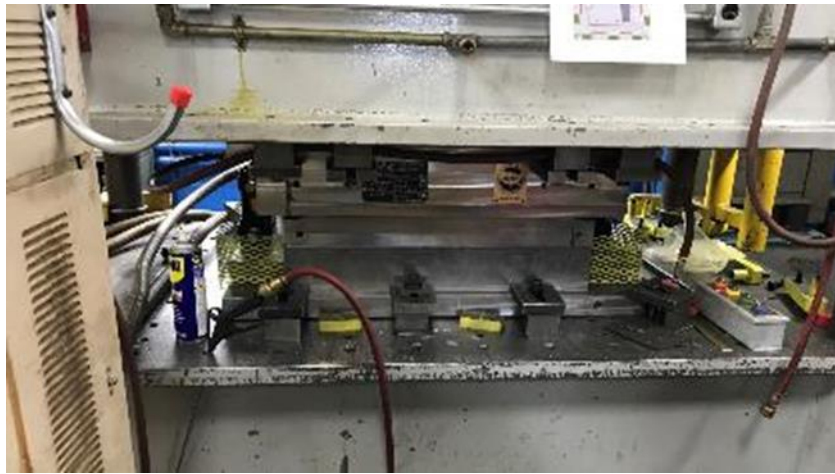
Class-A SMC Production Level tool 864 mm x 1054 mm footprint
